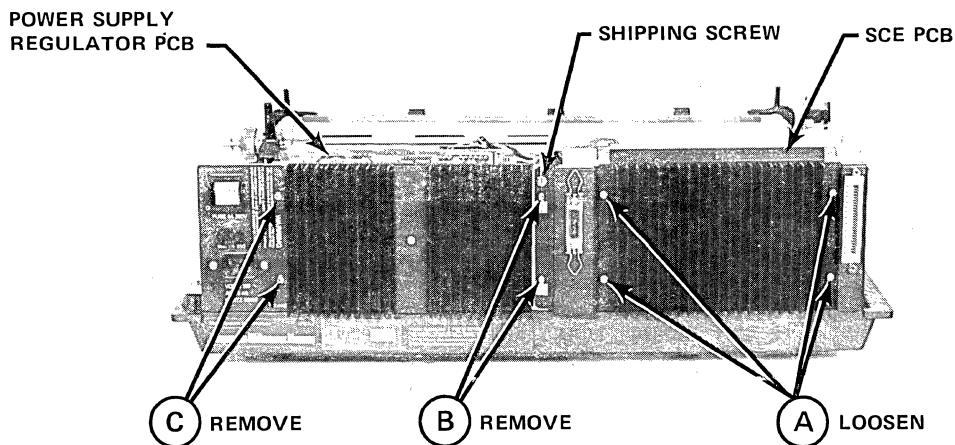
MOUNTING SCREWS FOR SCE AND P/S REGULATOR CIRCUIT BOARDS
